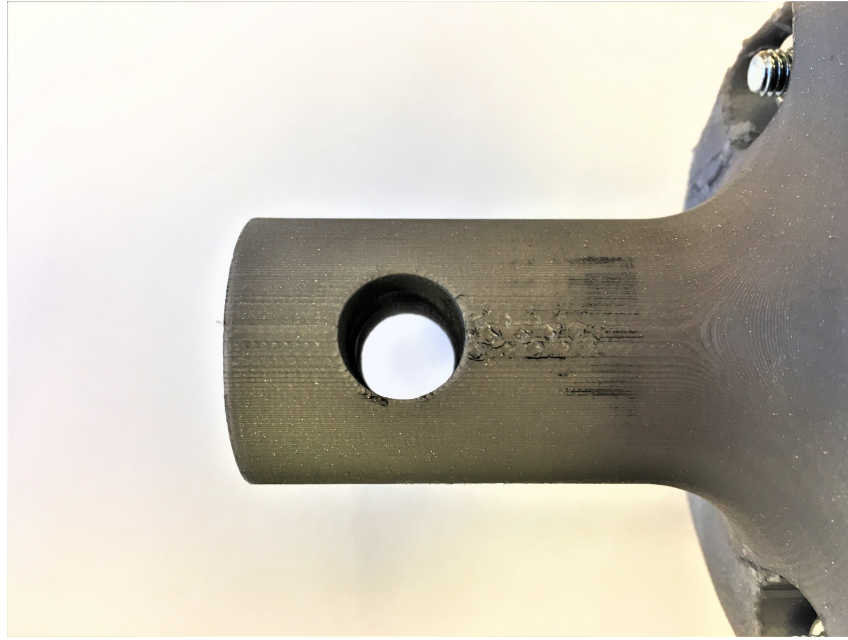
Image of the part of the 3D print jig attached to the bottom part of the jig. Notice the lack of deformation at the hole where the bolt attaching the jig to the machine was attached.
